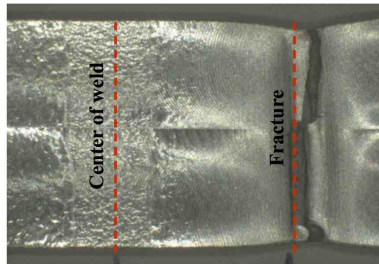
Macro image of a GMA tensile specimen oriented transverse to the welding direction. The dashed lines indicate the location of the center of the weld and the location of the fracture.
